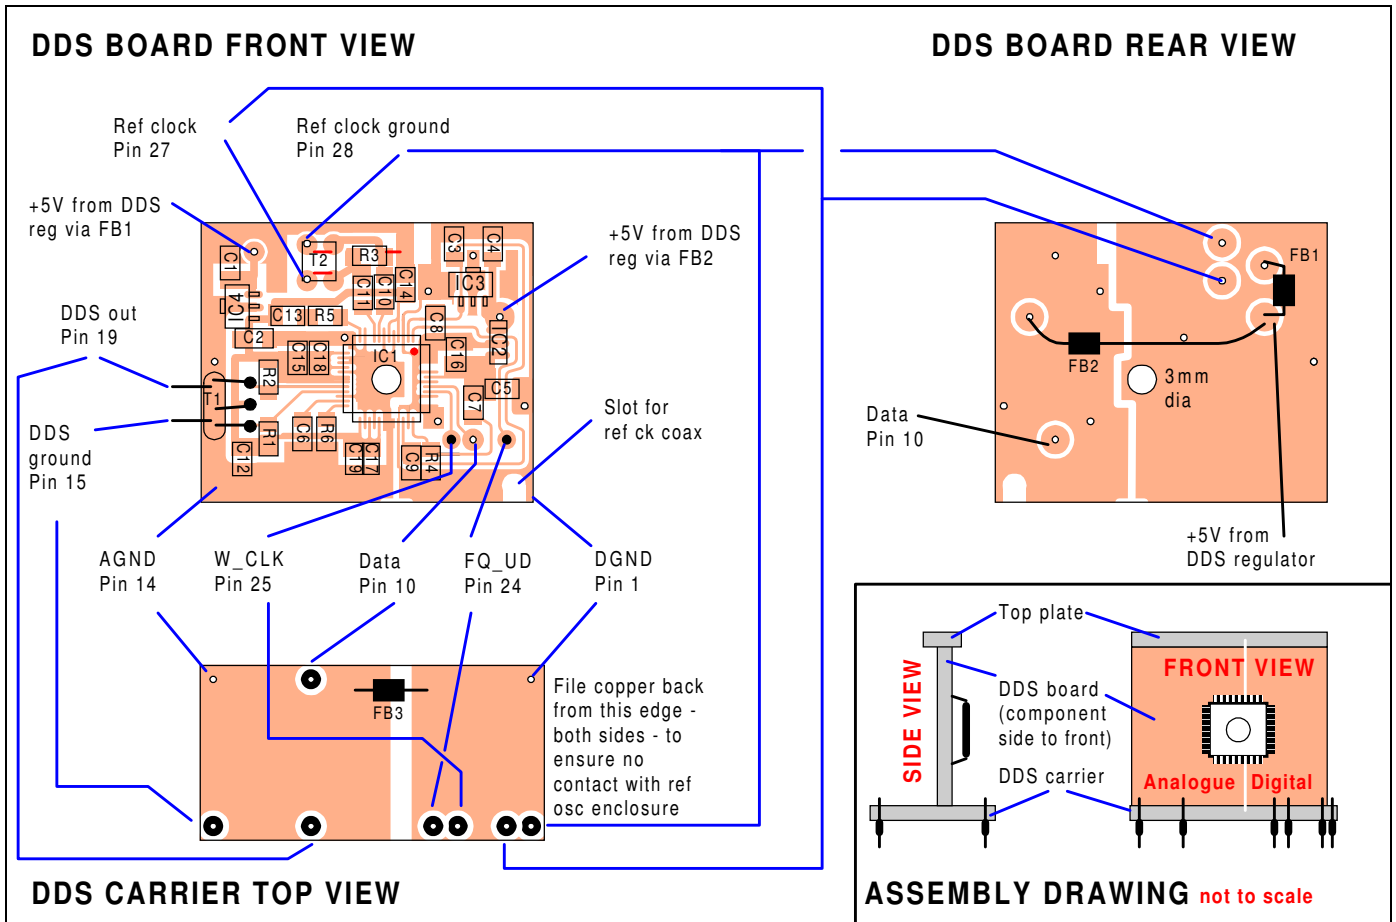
Component location and board assembly. The DDS board is slightly narrower than the DDS Carrier to ensure it does not touch the existing reference oscillator enclosure. The rear of the DDS carrier is not shown since it has no components. The Top plate is specified in the text.
